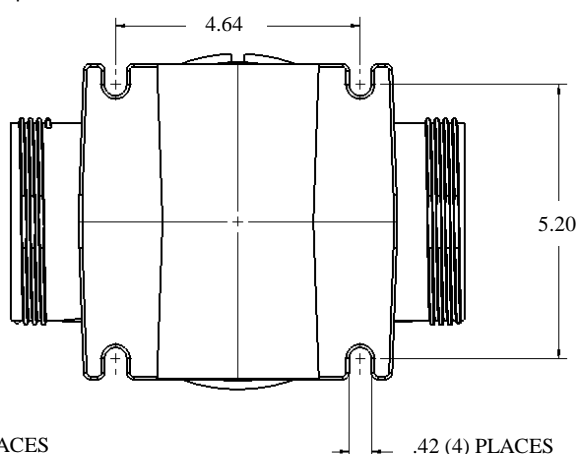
SB-Series base mounting pad (bottom view) – 1-1/4" thru 2".
